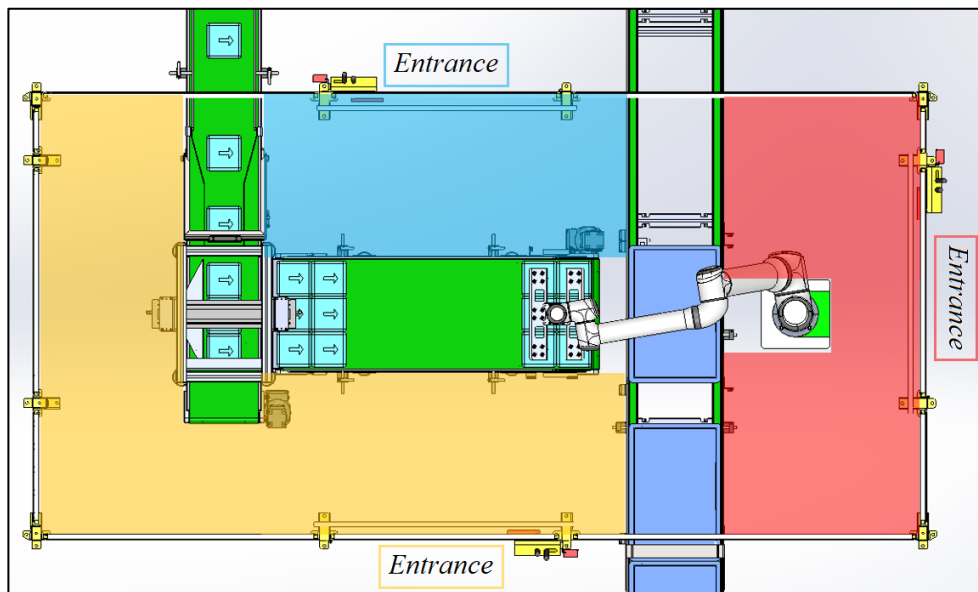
Top view of the Packaging Workstation's machine guarding.
